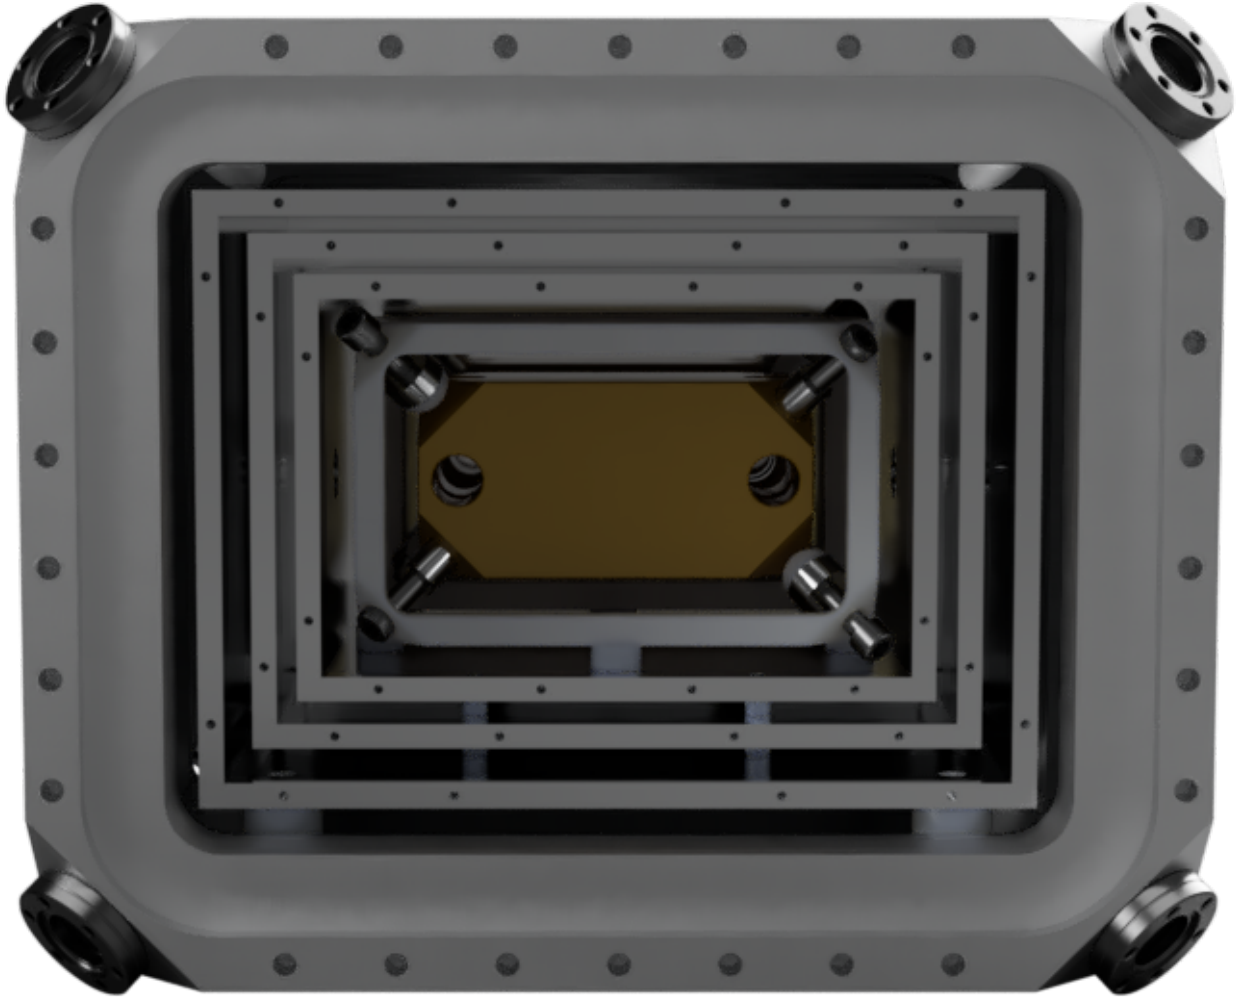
Cavity vacuum chamber rendering, opened to show the nested thermal shield and cavity mounting assemblies.
